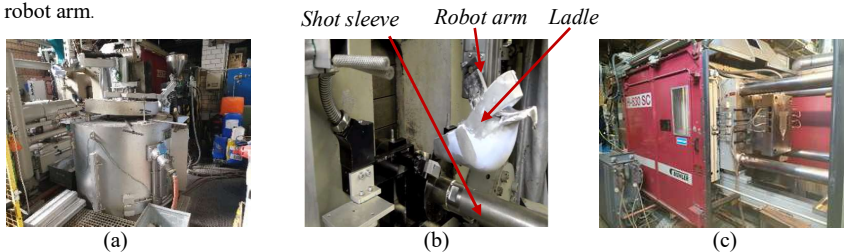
The HPDC setup consisting of (a) the holding electric resistance furnace, (b) the shot sleeve, ladle & robot arm and (c) the vacuum assisted die.
